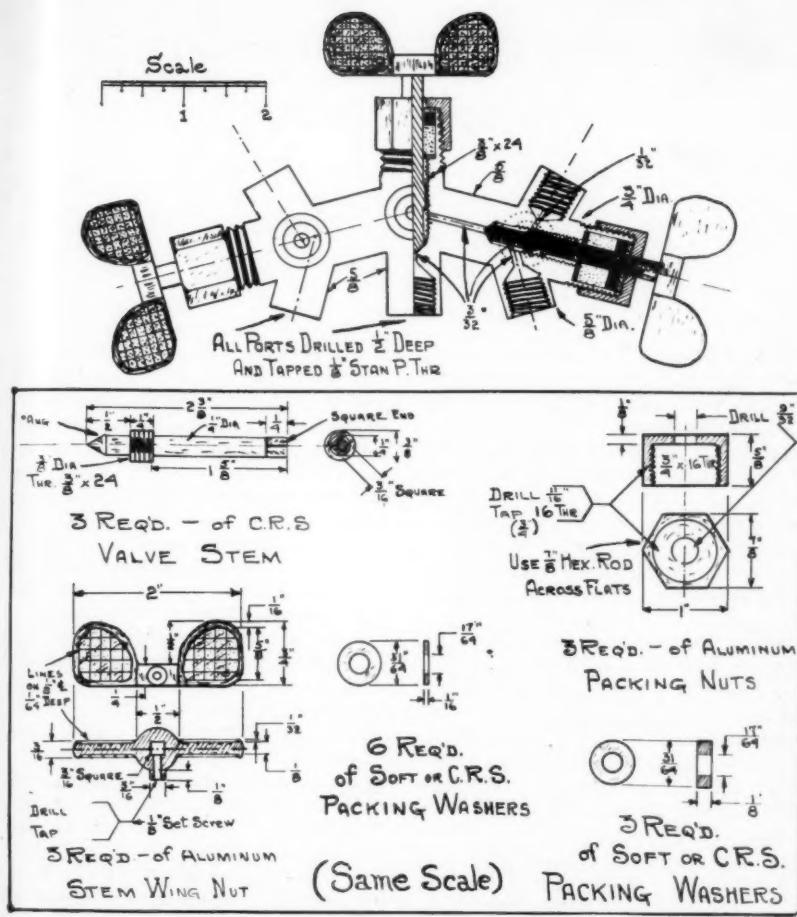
DIAGRAM OF ASSEMBLED TEST OUTFIT
